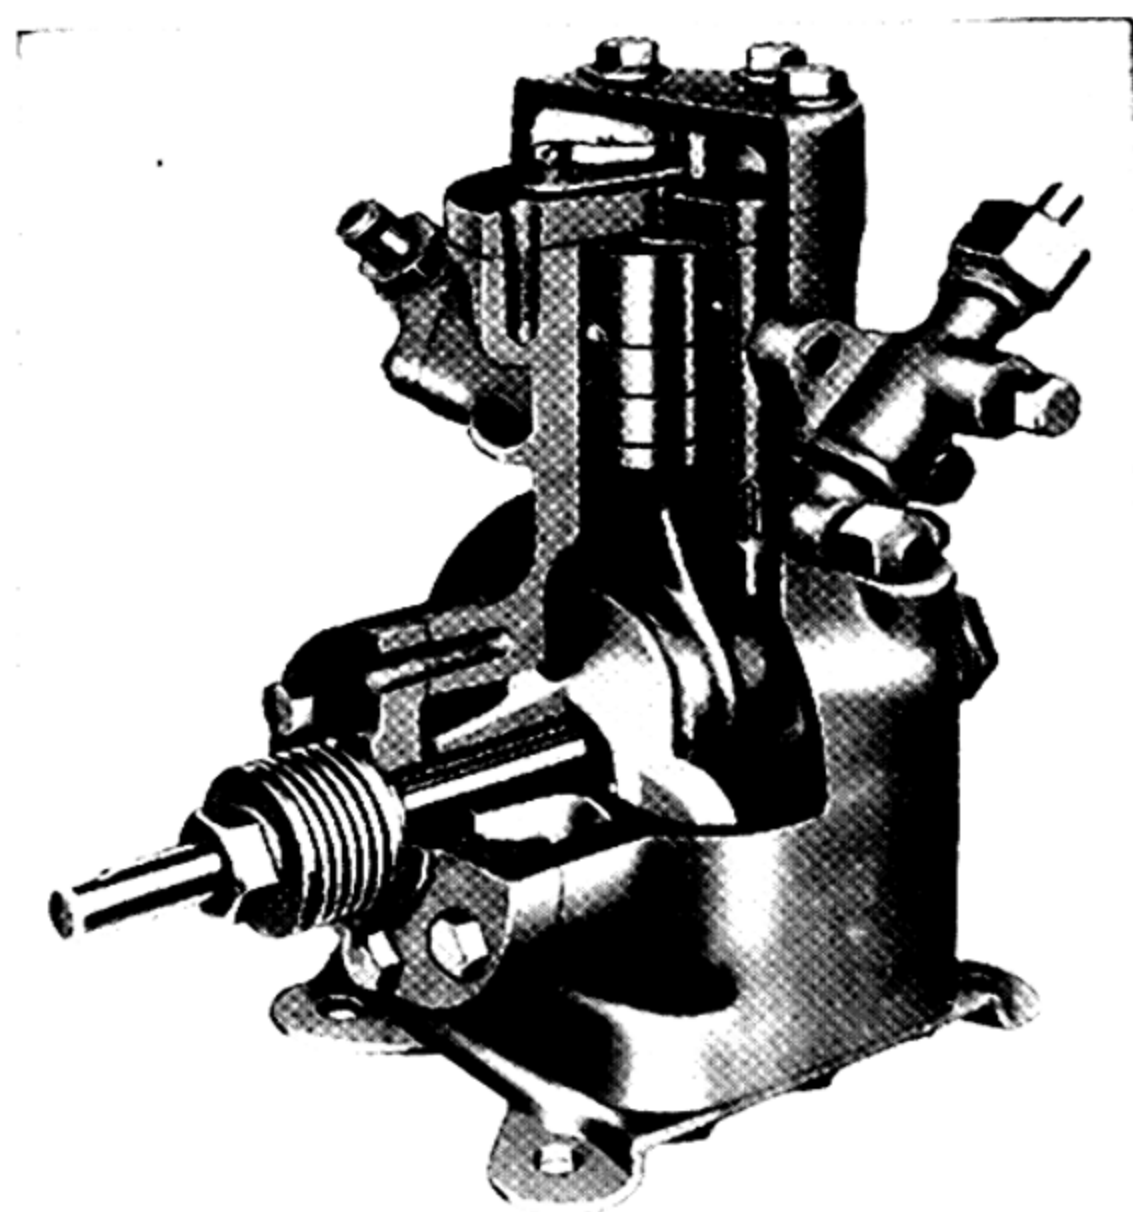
Single-cylinder vertical compressor. Courtesy Universal-Cooler Division, International Detrola Corp.
